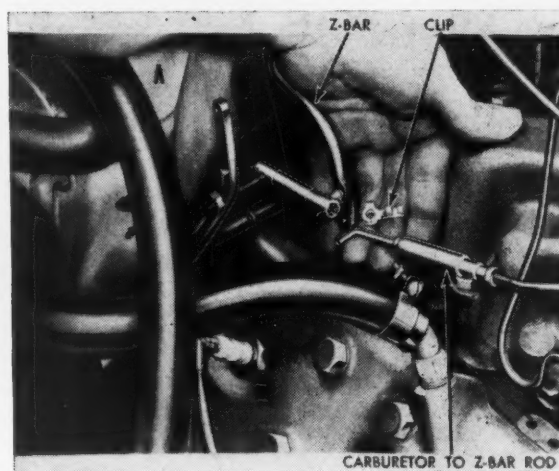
Position of lever when shift is in drive position. Lengthen rod, turn sleeve one full turn.
